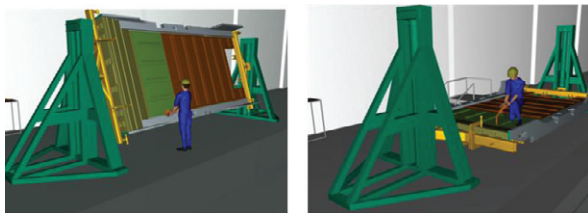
Brushing and welding operation on rotating building slip
